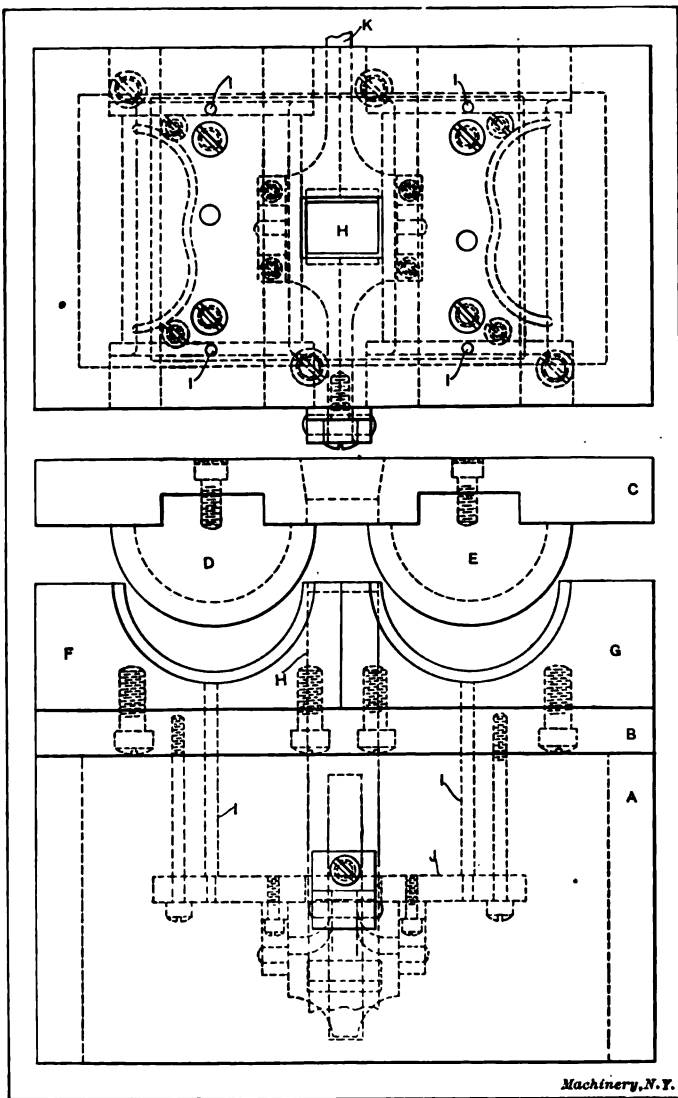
Casting-die for the Half-round Bearing shown in Fig. 14
